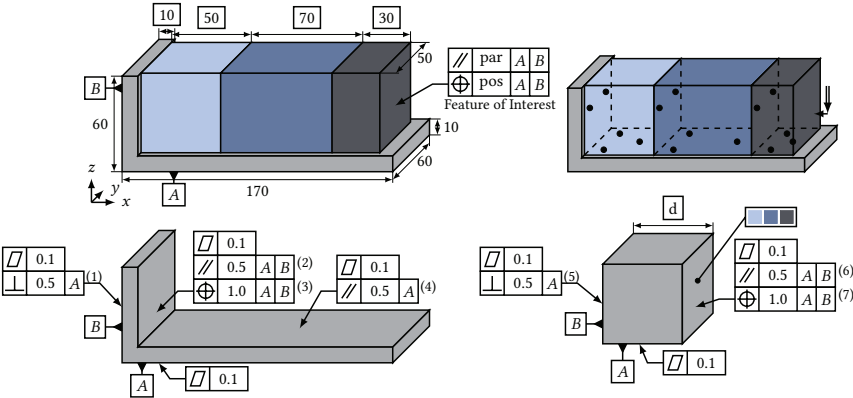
Tolerance Stack-Up of four Parts with geometrical Tolerances
